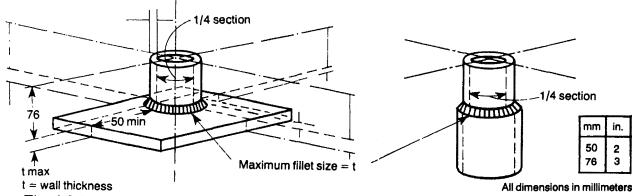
B—Sectioning of pipe-to-plate and pipe-to-pipe welds for macroetch testing Reprinted. by permission, from Section IX of the ASME Boiler and Pressure Vessel Code.
